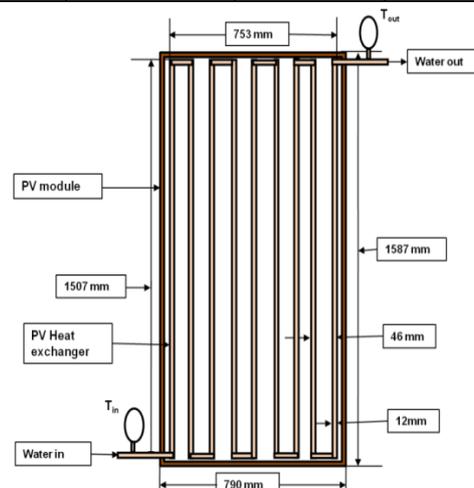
PV module and heat exchanger assembly with important dimensions and necessary features
